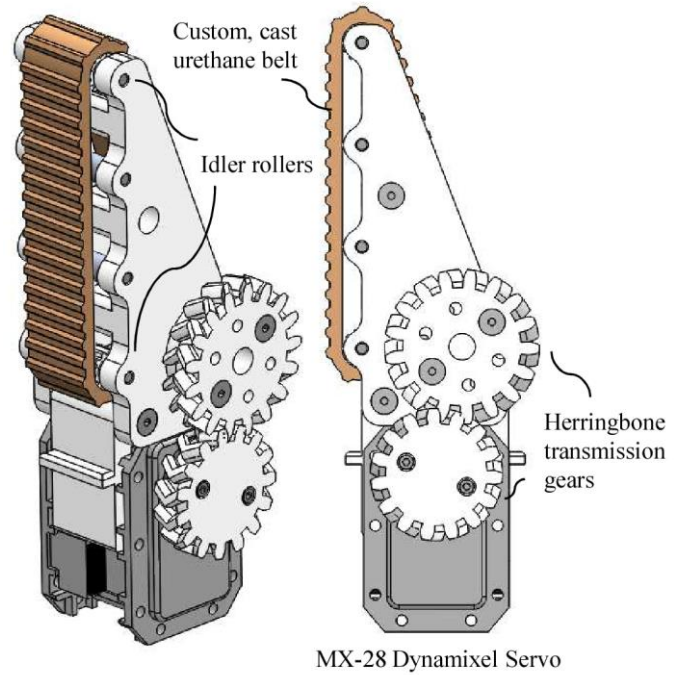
The thumb active surface module is comprised of a cast urethane belt supported by passive idler rollers in front and driven by an MX-28 Dynamixel Servo via printed herringbone gears
